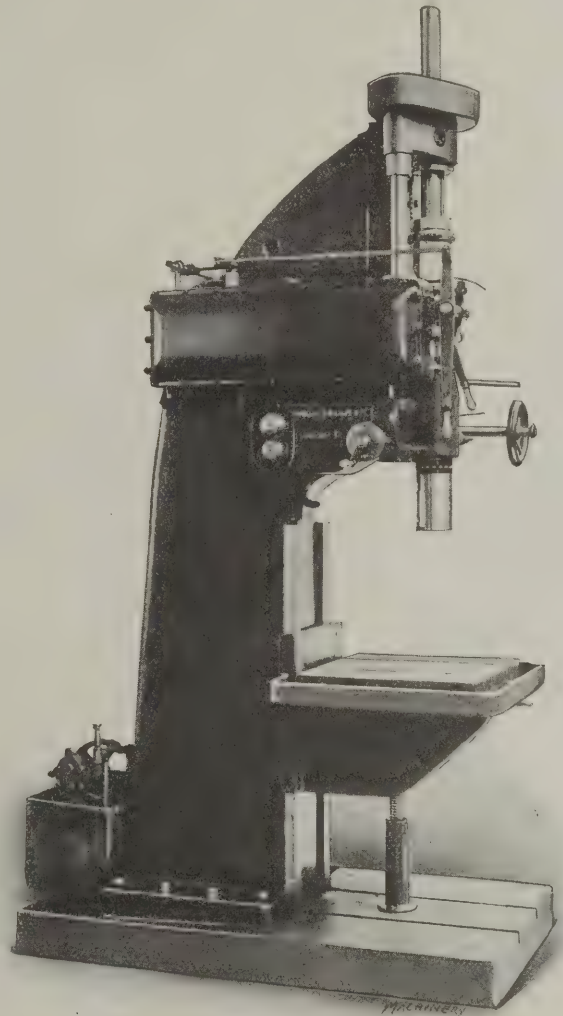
Baker Bros. Heavy-duty Drilling Machine
